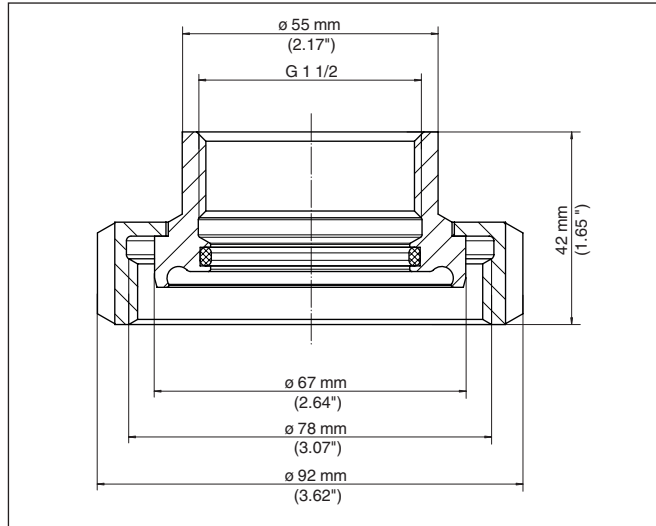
Dimensions of threaded adapter G1½ (DIN 3852-X) on slotted nut DN 50 (DIN 11864-1) PN 16
